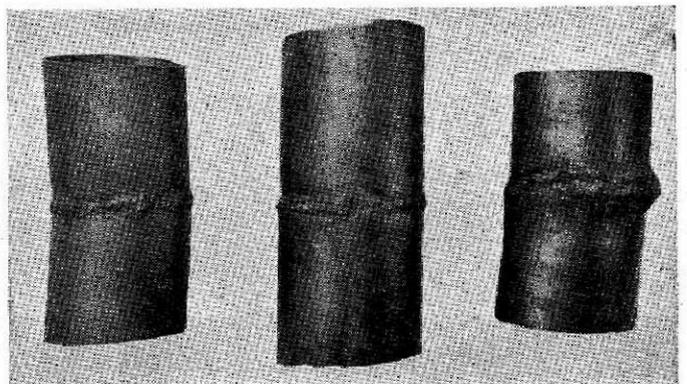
UNSOUND OXY-ACETYLENE WELDS IN MONEL TUBING, WHICH LED TO PITTING CORROSION ($\times \frac{1}{2}$)
